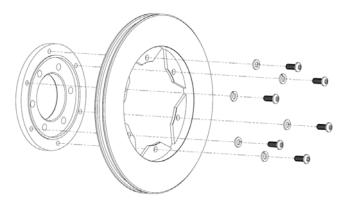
Use thread locker when assembling the 6 bolts and washers to each rotor sub-assembly.
